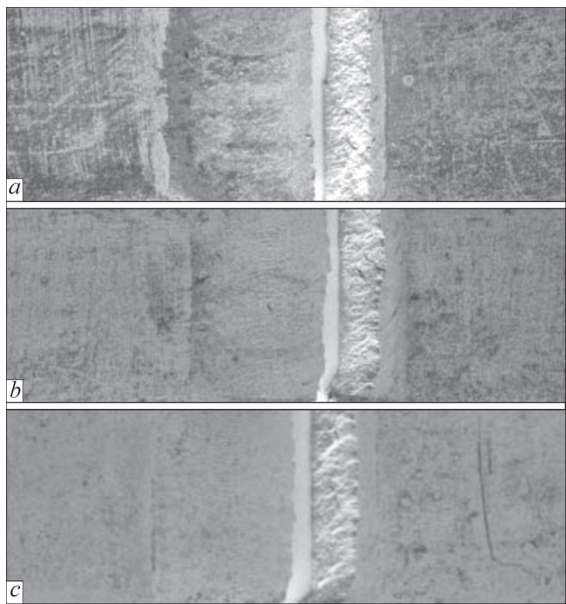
Appearance of the face surface of working part of 2 mm MA2-1M magnesium alloy specimens fractured as a result of static tension, which were produced by FSW at welding speeds of 8 (a), 16 (b) and 24 m/h (c)
